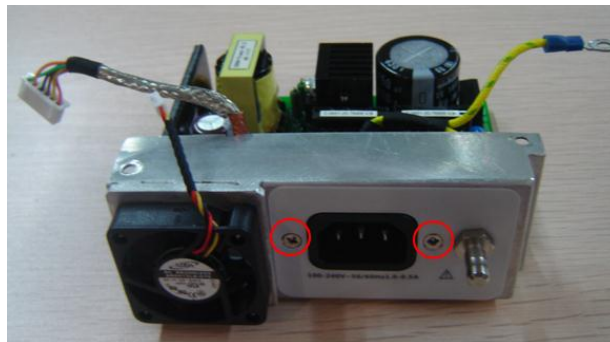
Disassembly of Fan of AC-DC Board (1)
